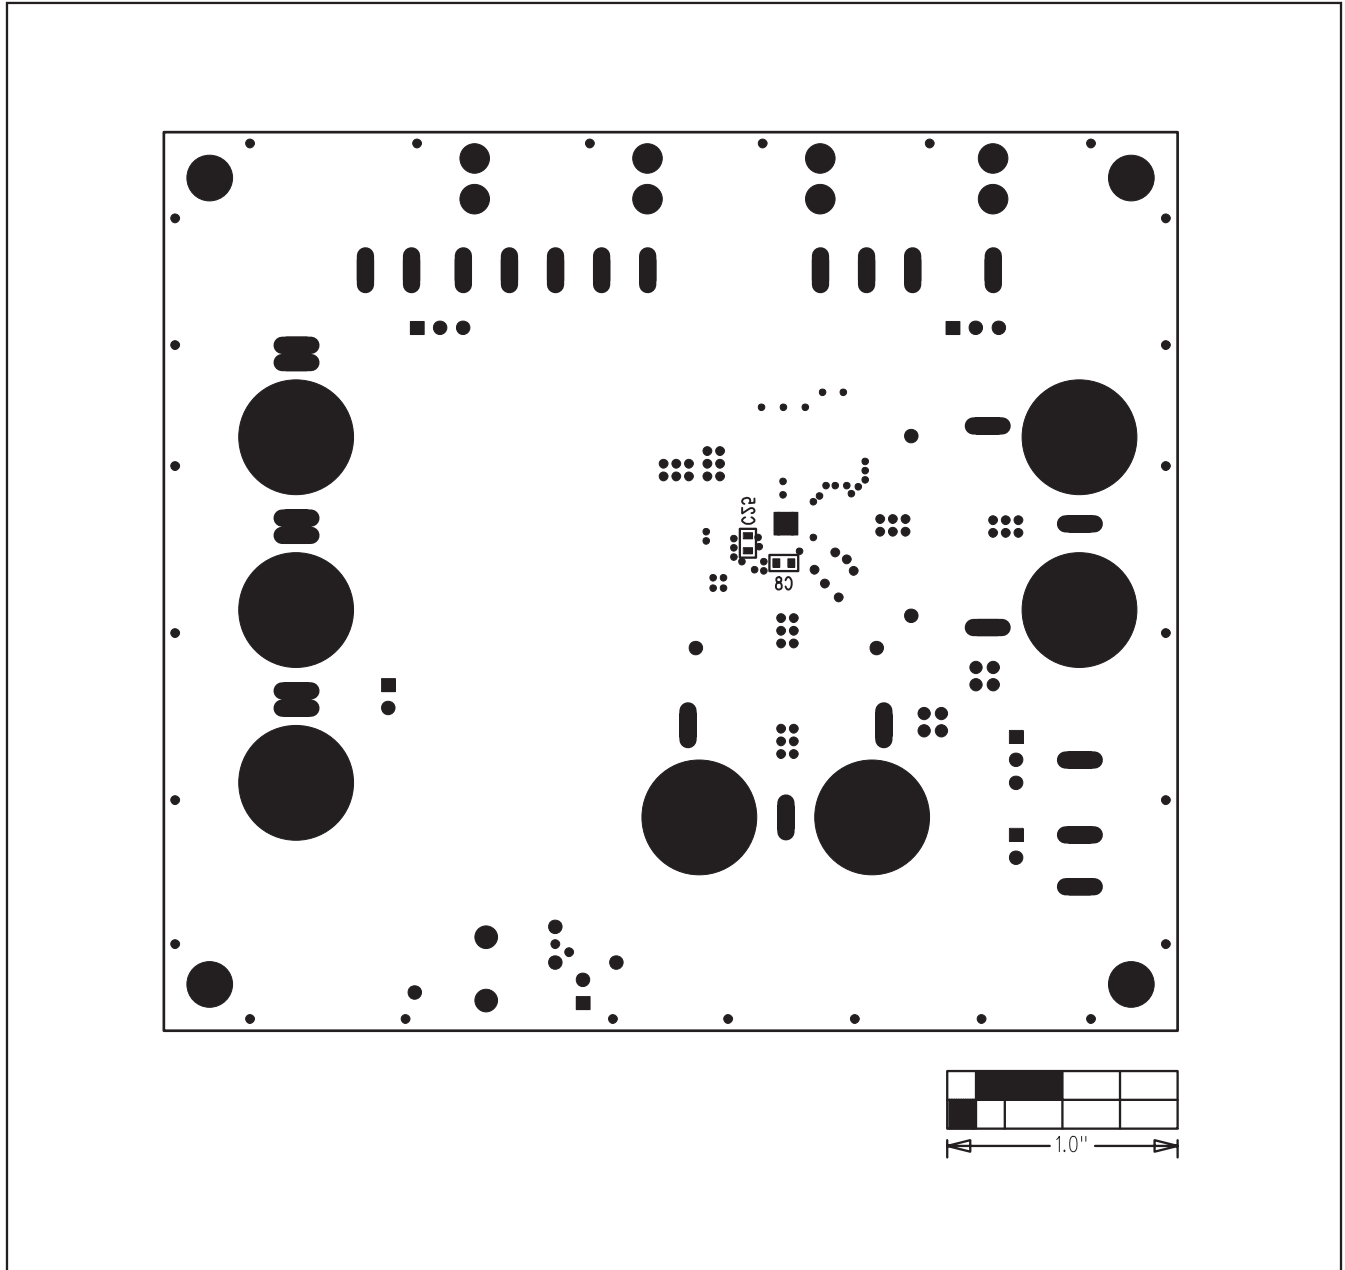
MAX9791A EV Kit Component Placement Guide—Solder Side
